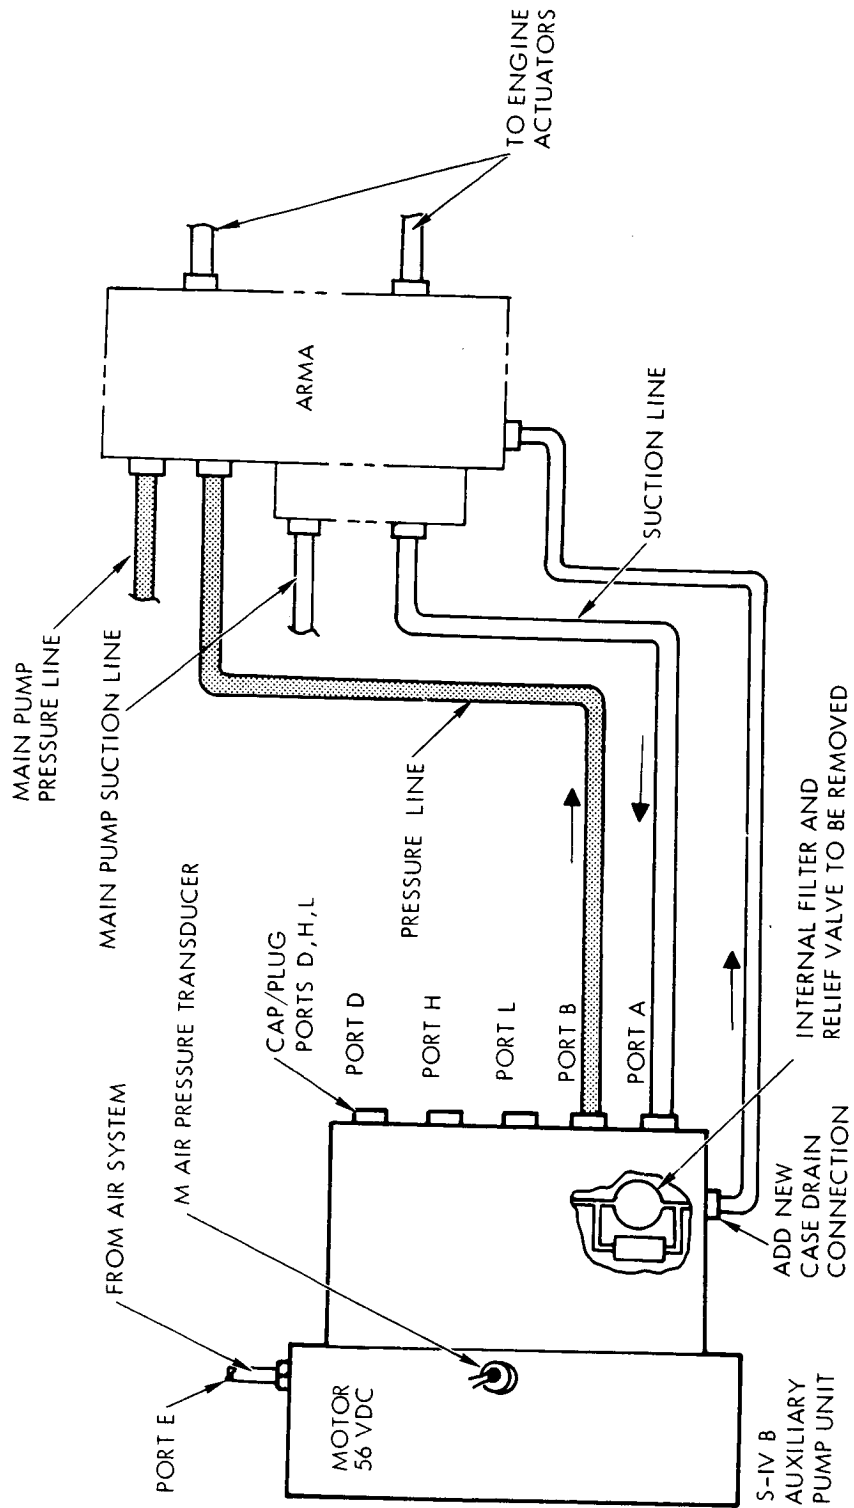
J-2S/S-II ARMA to AMP Line Routing, LEO Mission
